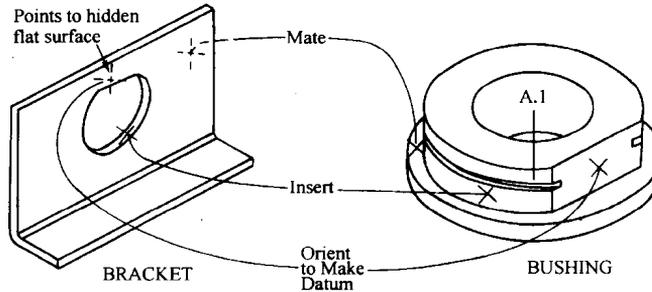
Constrains for assembly the BRACKET and BUSHING parts
